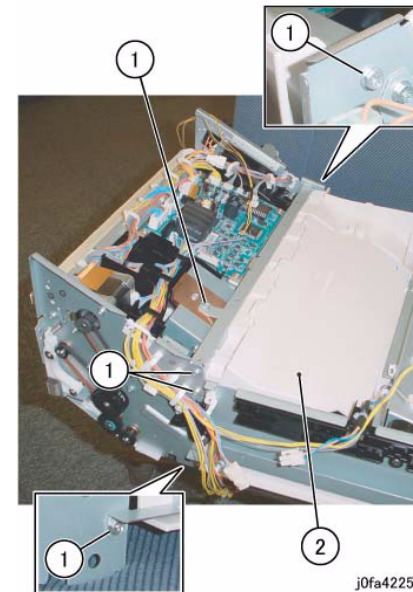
Removing the Stacker Tray Assembly (j0fa42250)
